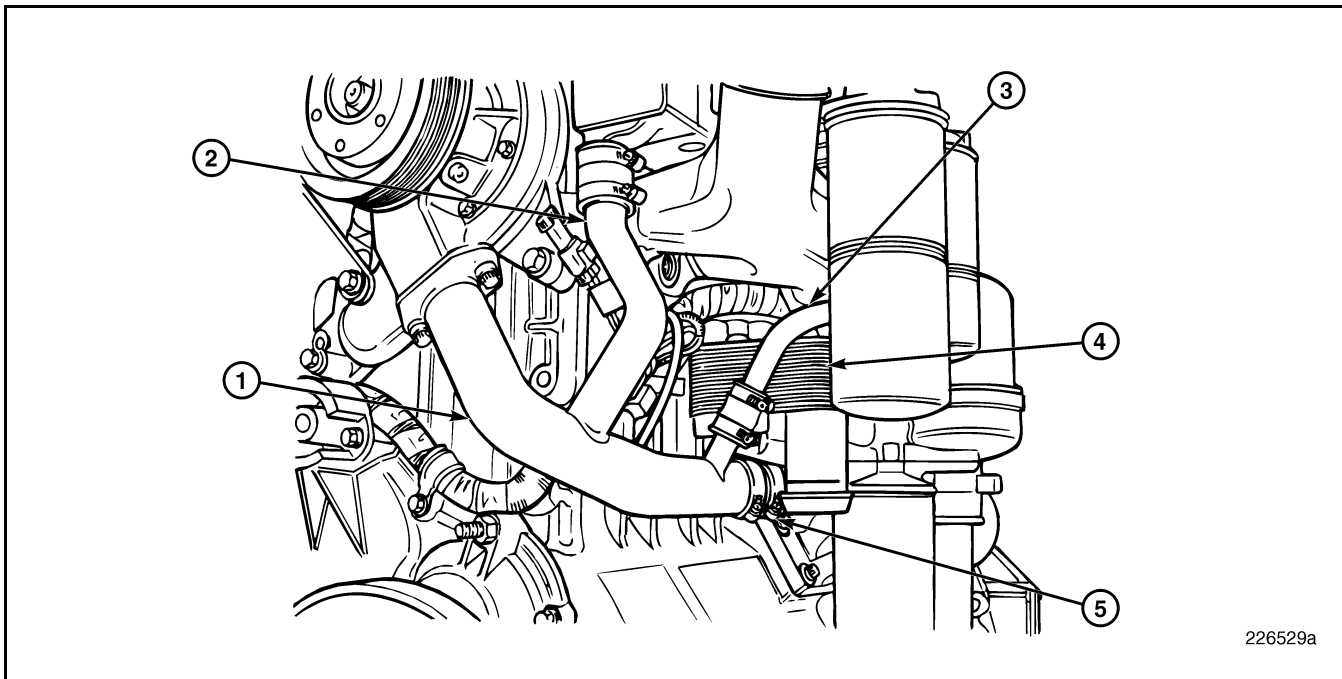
Oil Cooler-to-Water Pump Inlet Line
